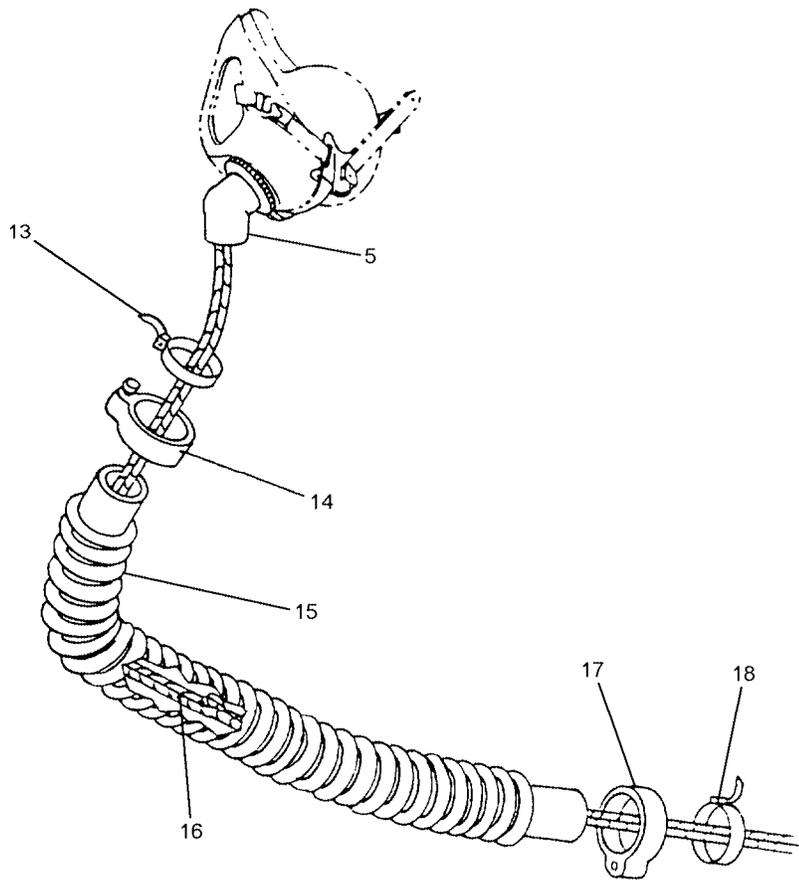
MBU-23(V)1/P Basic Oxygen Mask Assembly Components (Sheet 2 of 2)
